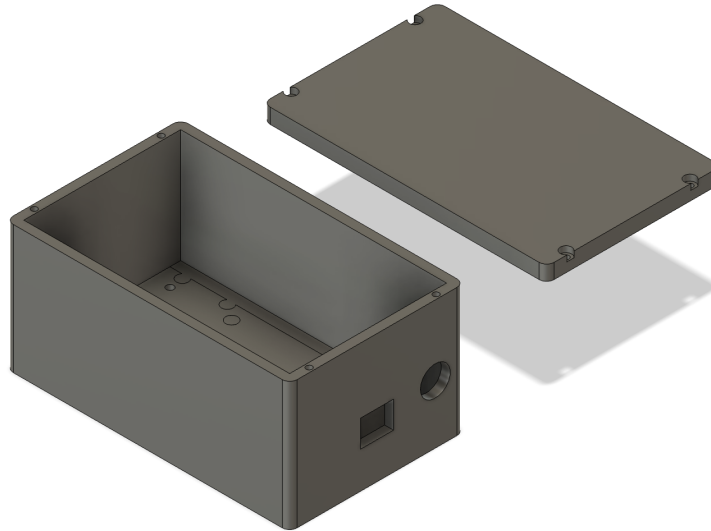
The CAD design of the sole box used to store the electrical components. The electrical components are a microcontroller and resistors, connected by wires on a PCB Board.
